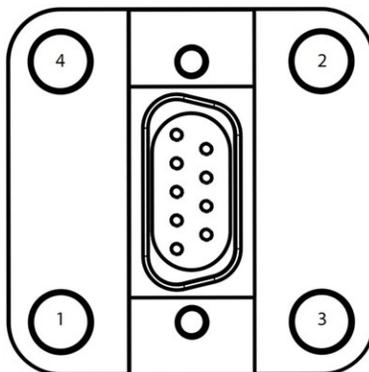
Bearing Sensor Feedthrough Removal (Rear (Left) Shown)
